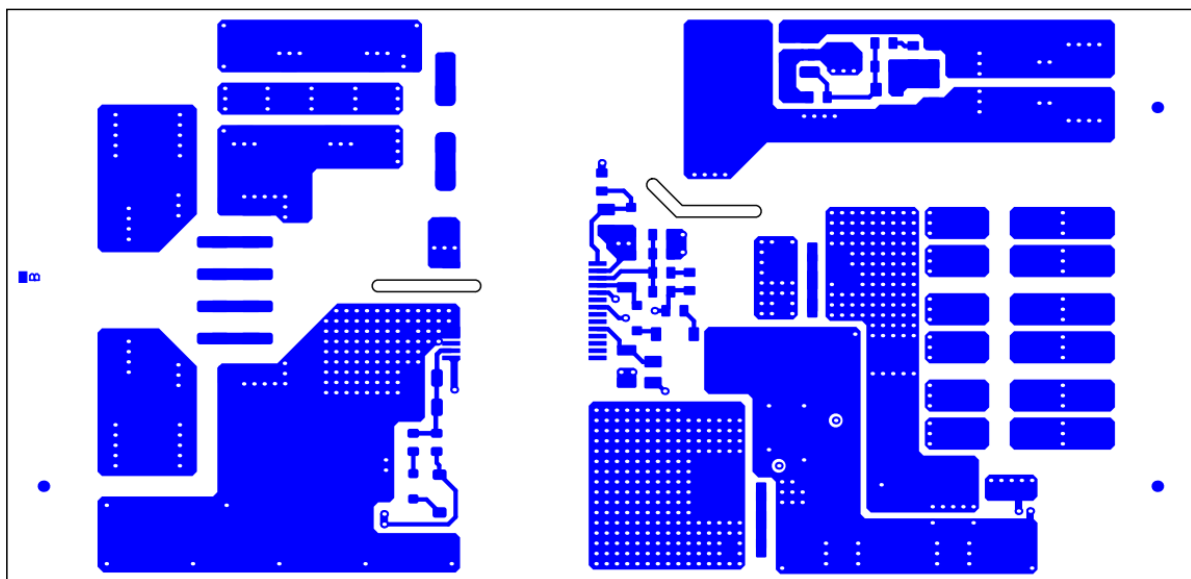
DER-1030Q Bottom Layer PCB Layout.
